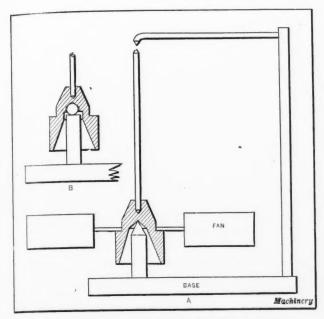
(A) Pointed Support for checking Balance of Fan;
